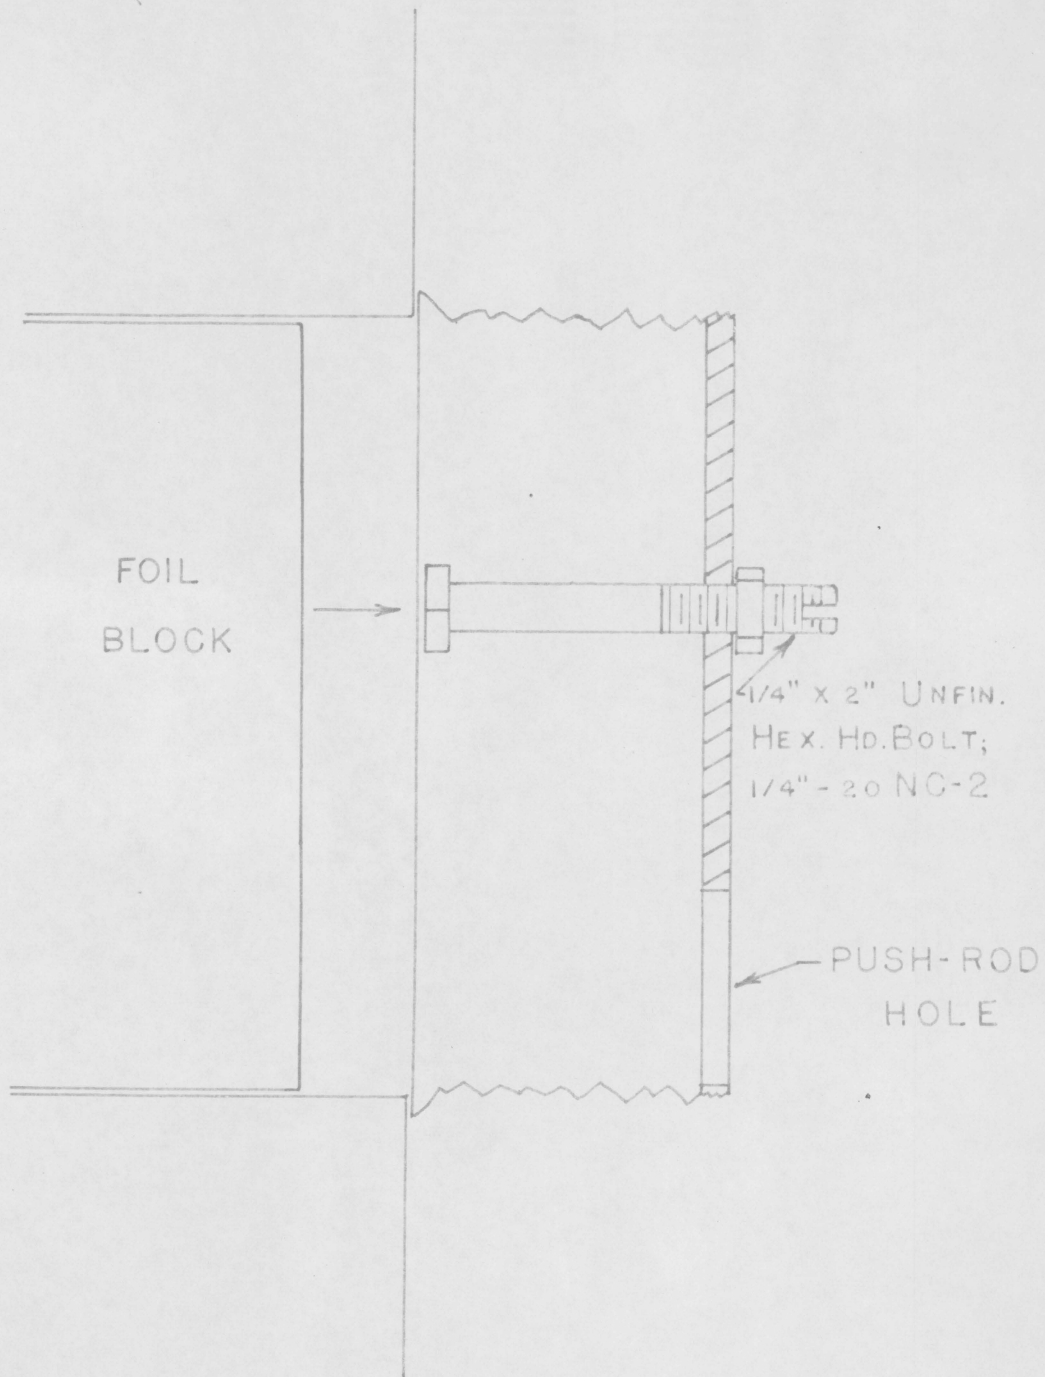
PLAN VIEW OF FOIL BLOCKS
